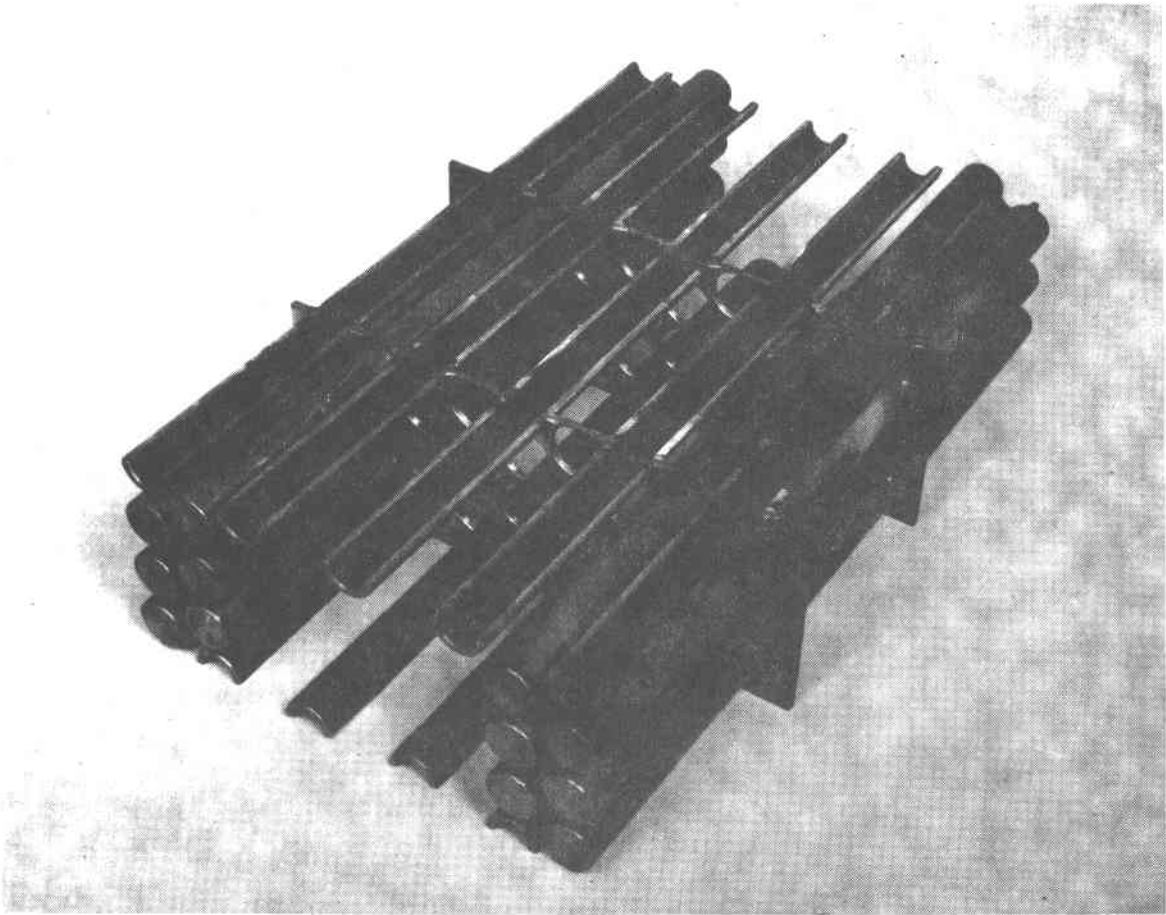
Flowby Module Tube Sheet with Inactive Tubes Installed
